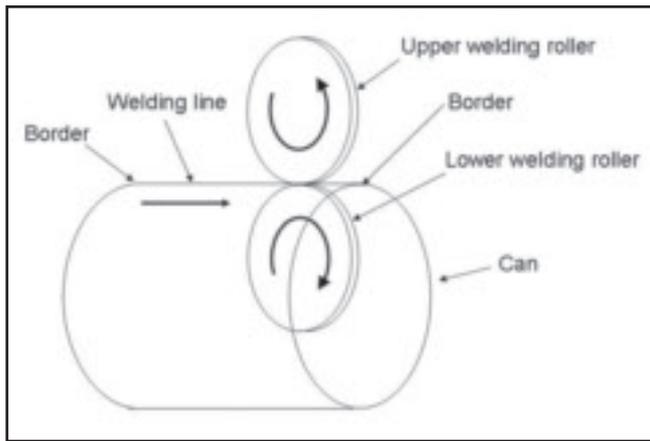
Working principle of the welding machine described in this work. The bent tinplate is driven between two welding rollers. Welding takes place in the contact area between the surfacing can edges (weld interface).
